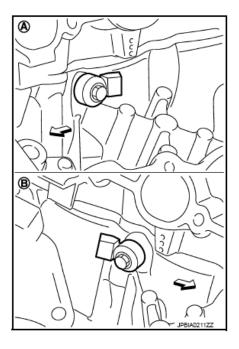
Identifying Knock Sensor Courtesy of NISSAN MOTOR CO., U.S.A.
